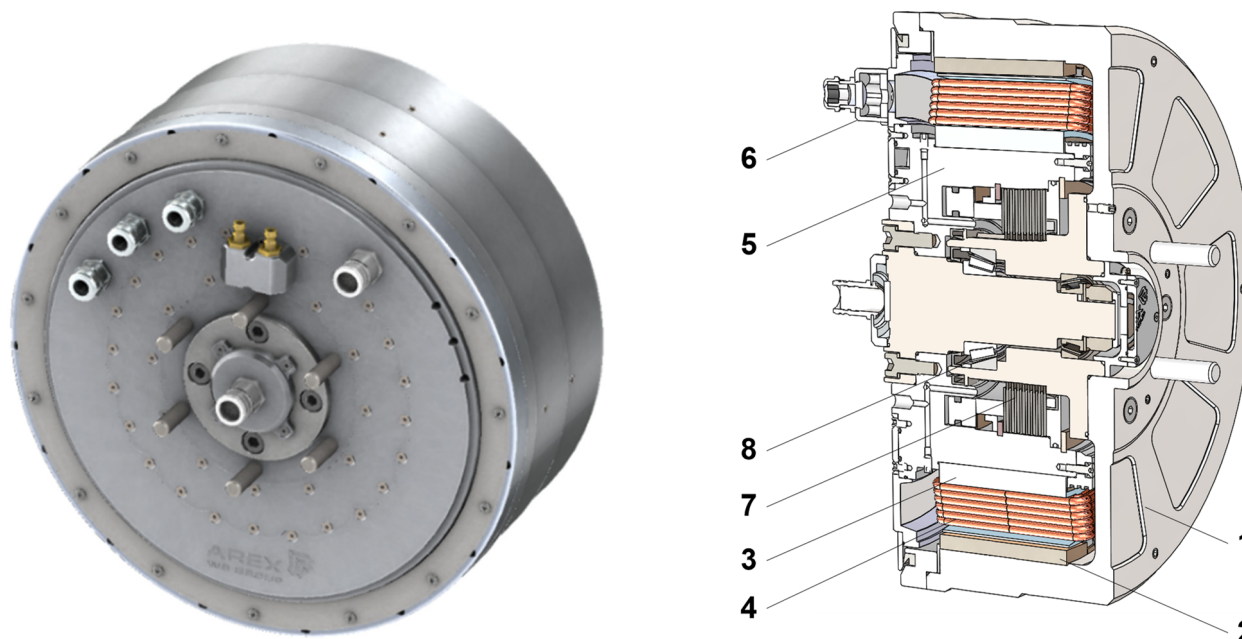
View of the prototype and a cross-section of the drive module for mounting in the Electric Light Commercial Vehicle wheel developed by AREX Sp. z o.o. 1—rotor, 2—magnets, 3—stator's magnetic core, 4—stator winding coils, 5—supporting structure, 6—entry for supply wires, 7—wet brake, 8—bearings system.
